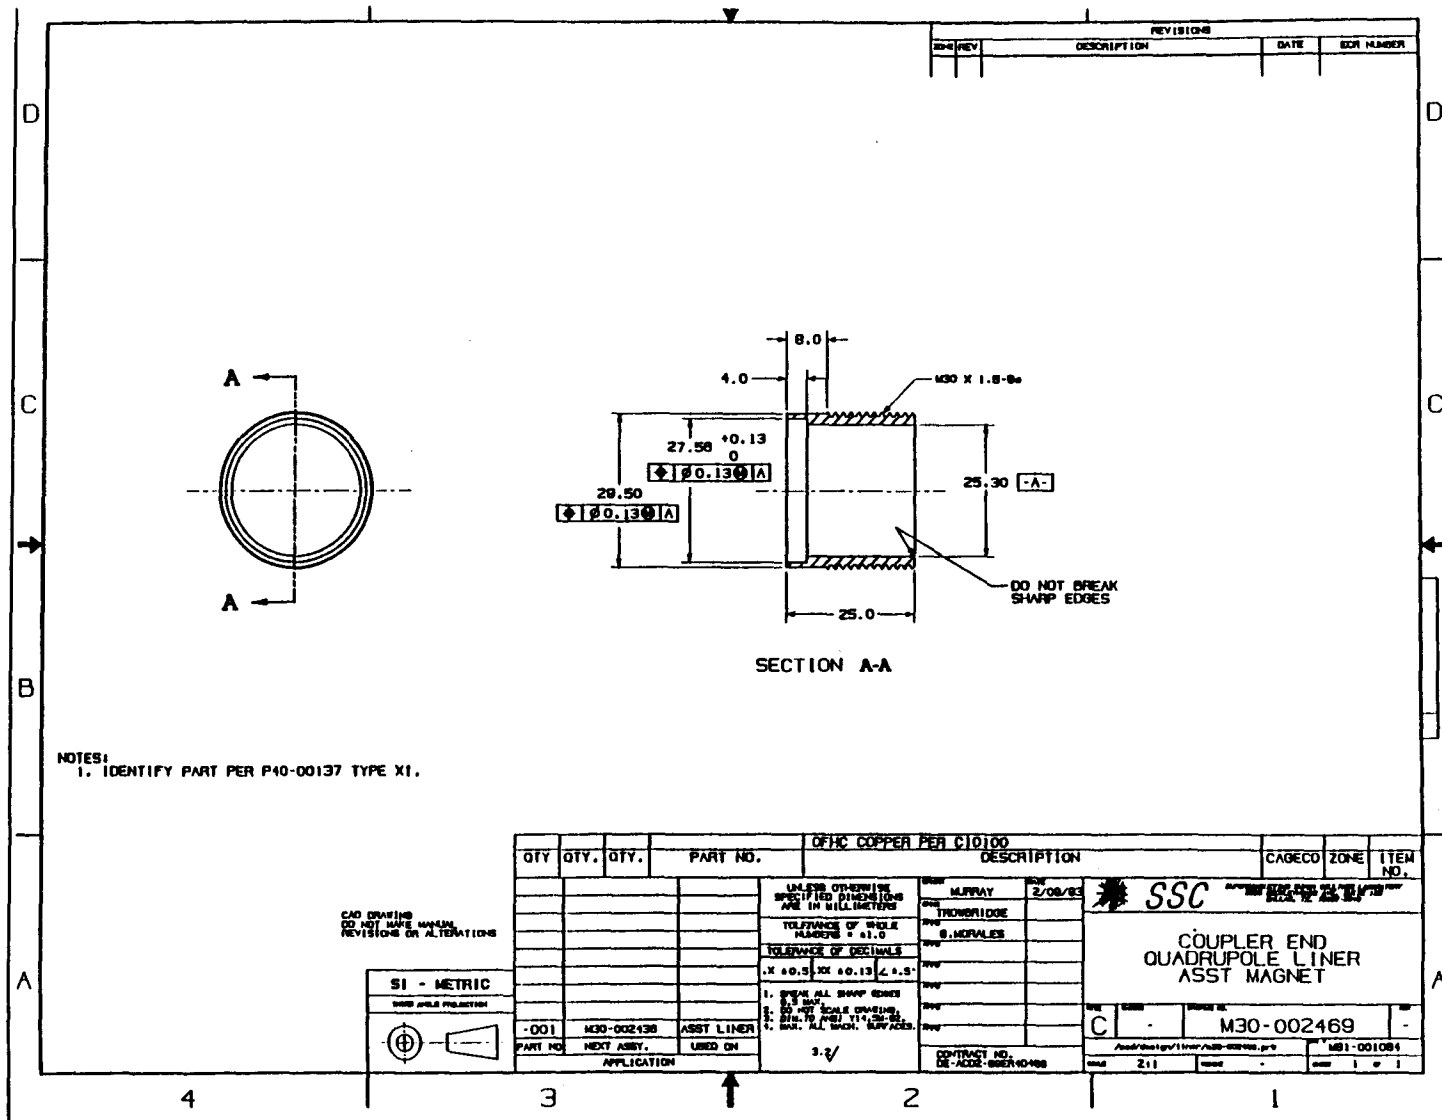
Sleeve of Good Thermal Contact Joint Which Brazes to Quadrupole Liner.
